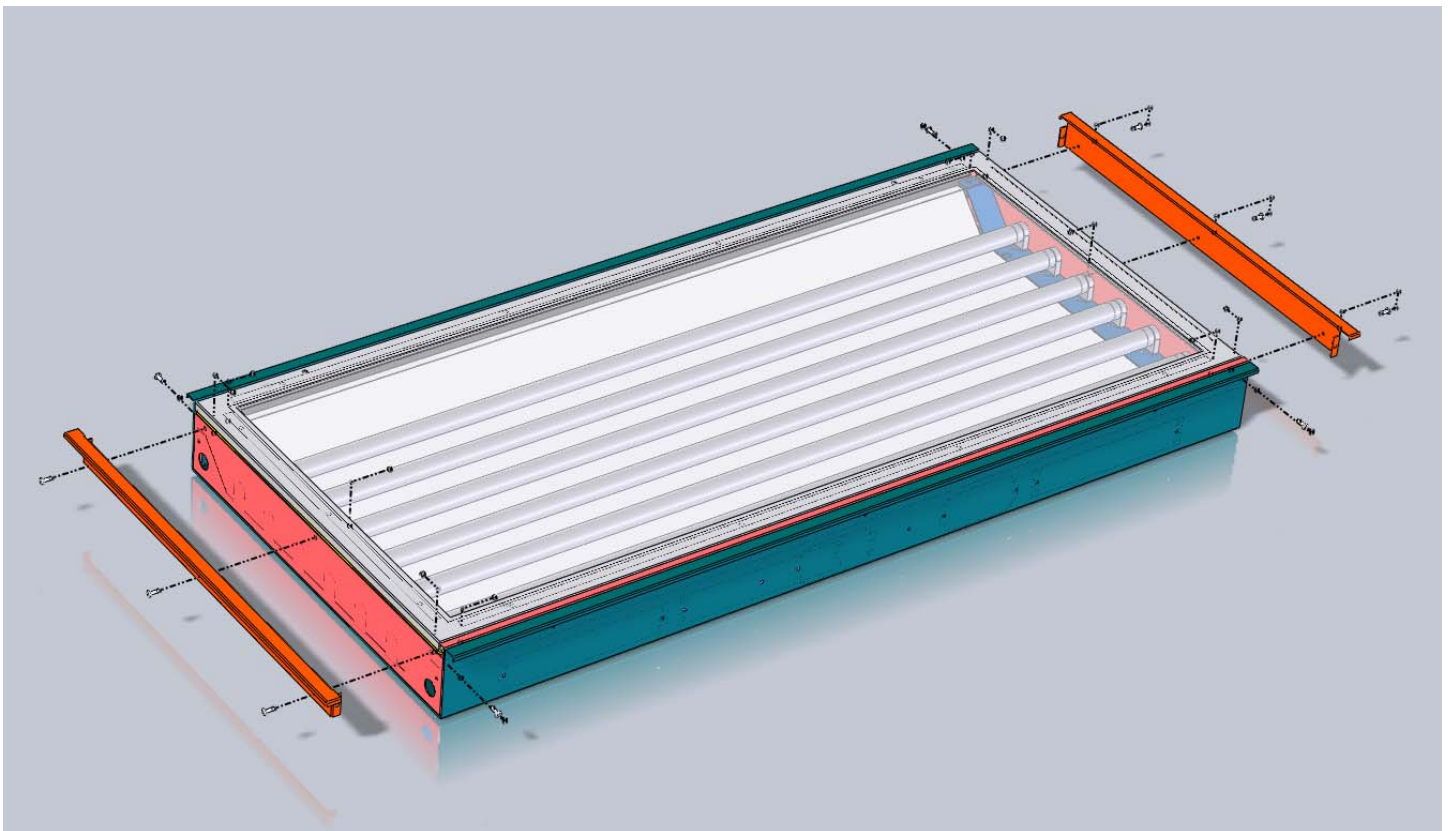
Flange Mounting - Single Flanged Troffer
